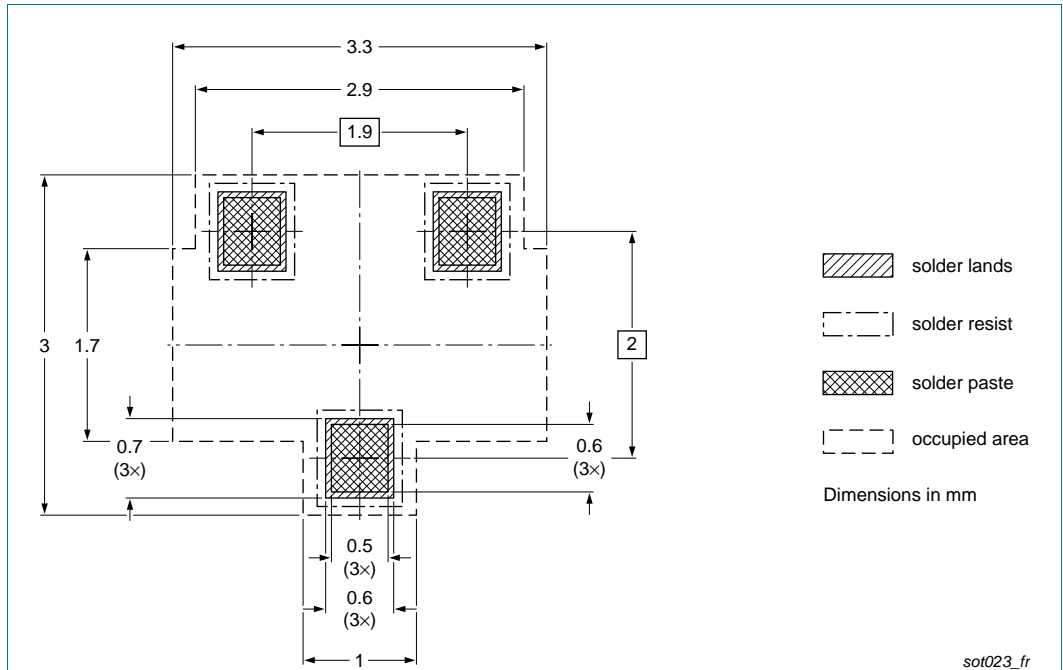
Reflow soldering footprint PDTA143XT (SOT23)
